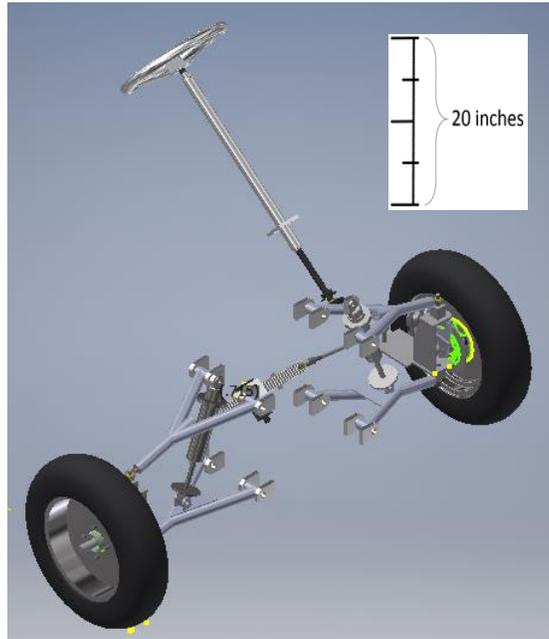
Cad model used to test the Ackerman conditionCondition-The real assembly2.iam
